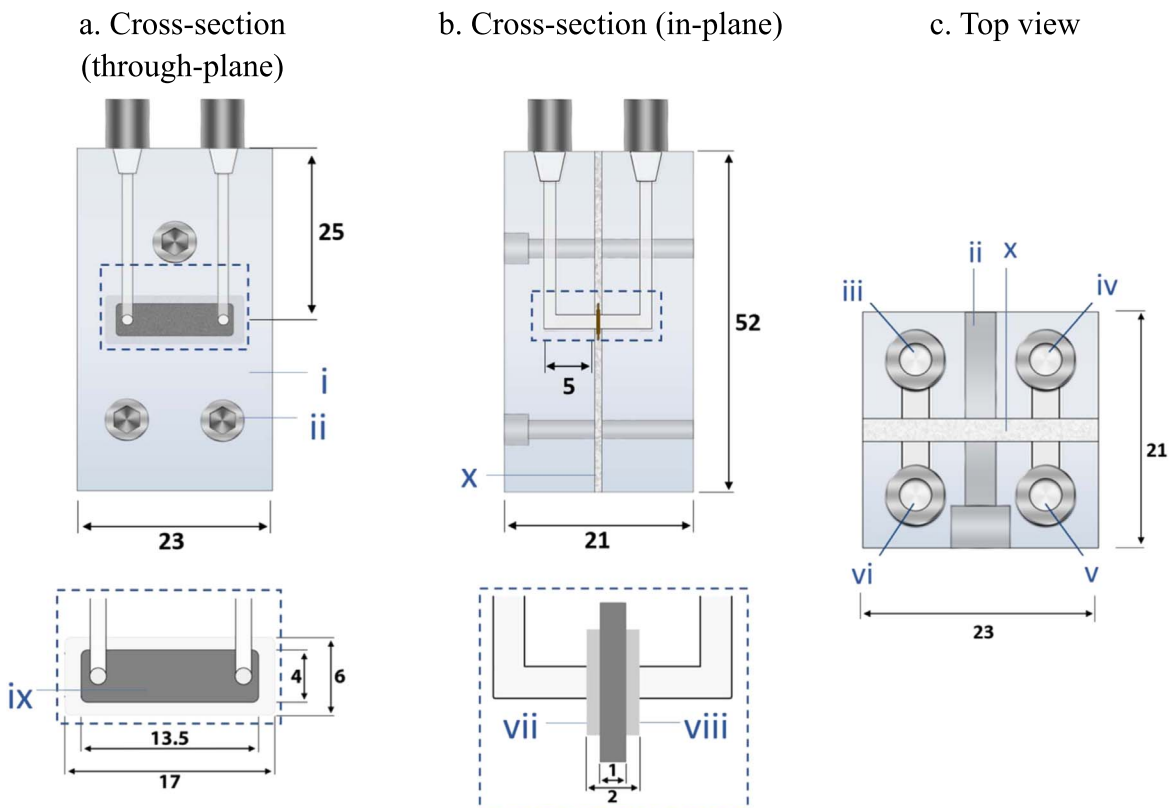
Design of the flow cell and dimensions: a) cross-section of through-plane view; b) cross-section of in-plane view; c) top view. i - cell housing; ii - connection screws; iii - water inlet; iv - water outlet; v - air inlet; vi - air outlet; vii - air supply channel; viii - water supply channel; ix - PTL; x - Teflon sealing.
